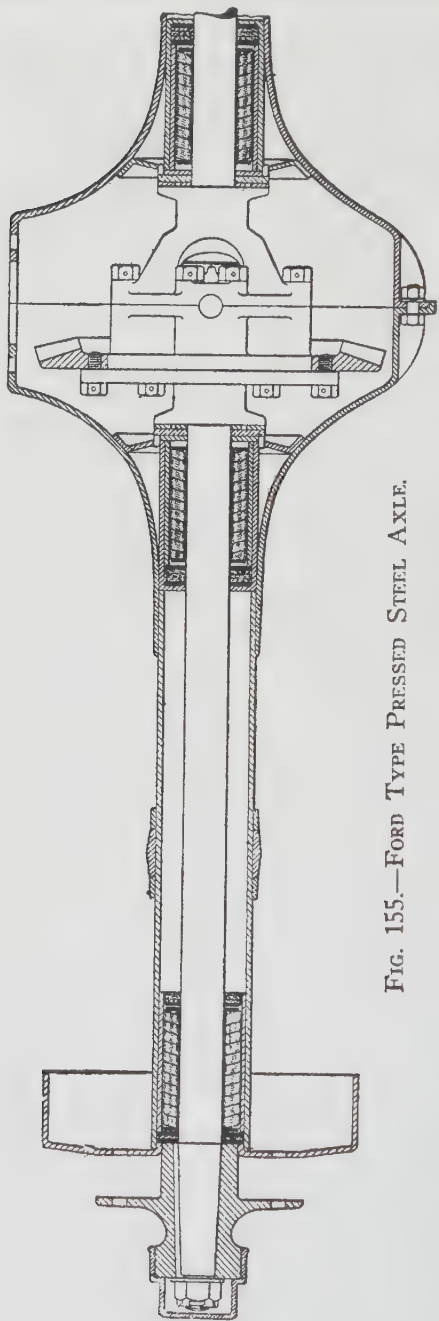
FORD TYPE PRESSED STEEL AXLE.
